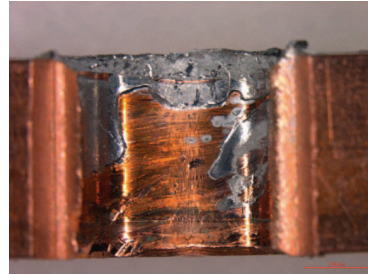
Cut through a copper bus bar after removal of the socket indicating the insufficient distribution of solder.
